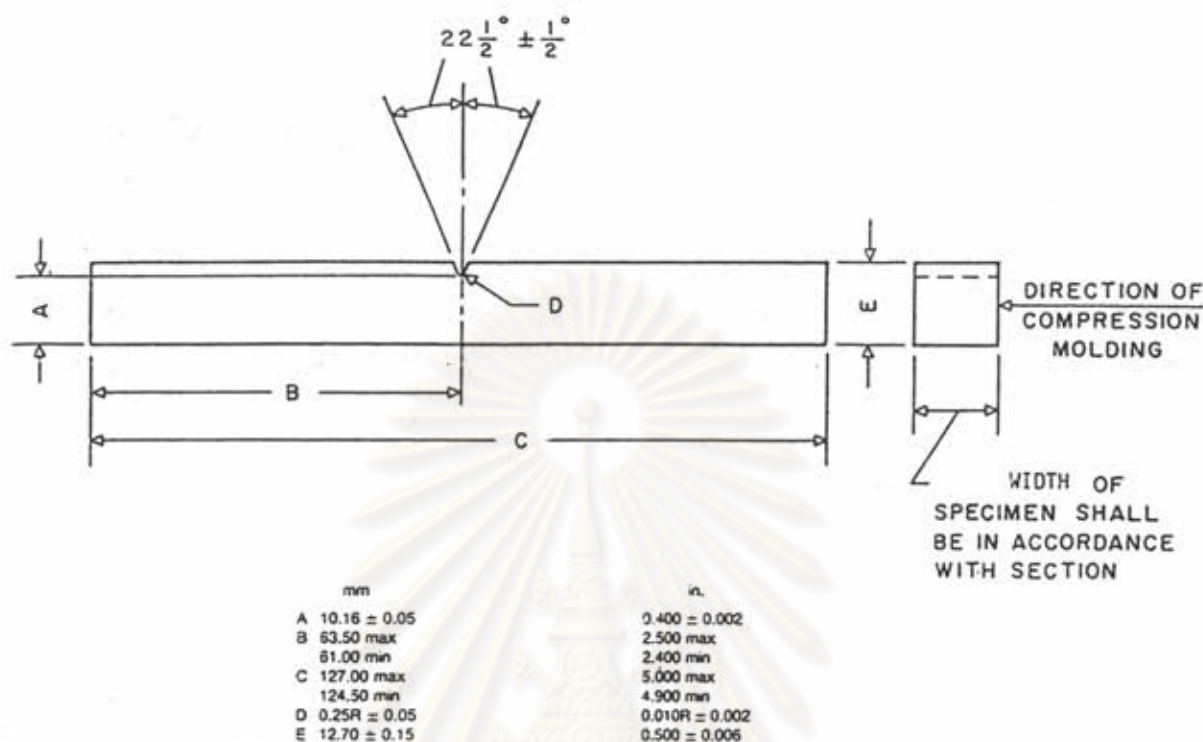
Dimensions of Simple Beam, Charpy Type, Impact Test Specimen
